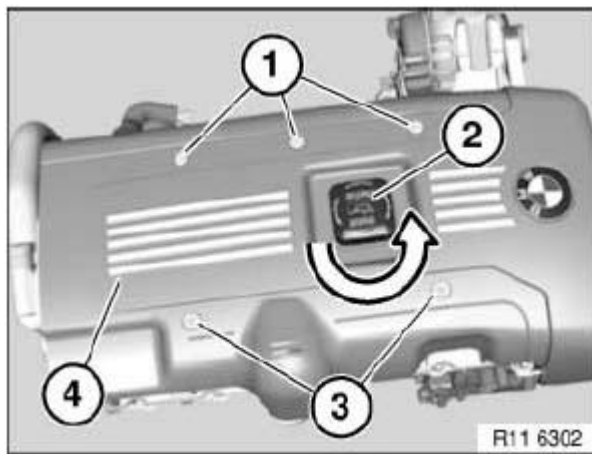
Identifying Oil Cap, Acoustic Cover And Retaining Screws
